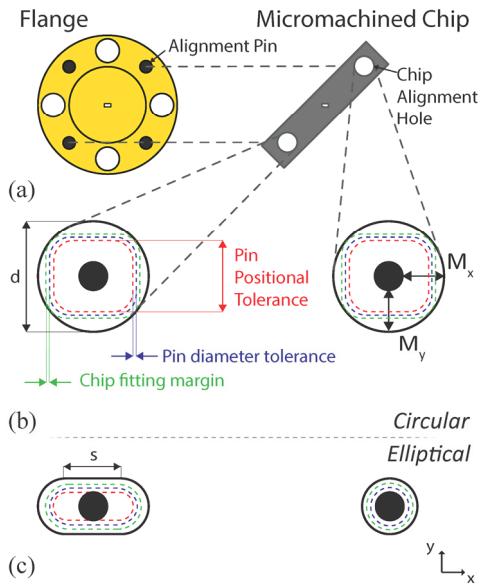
(a) Fitting of microchip on standard flange; (b) conventional concept: oversized alignment holes required to fit all worst-case fabrication tolerance combinations of the flanges, to avoid breakage of the brittle chips; (c) proposed new concept: tightly fitting circular hole (right), vastly limiting chip movement, and “elliptical” alignment hole (left), accommodating flange alignment-pin positioning tolerances.
